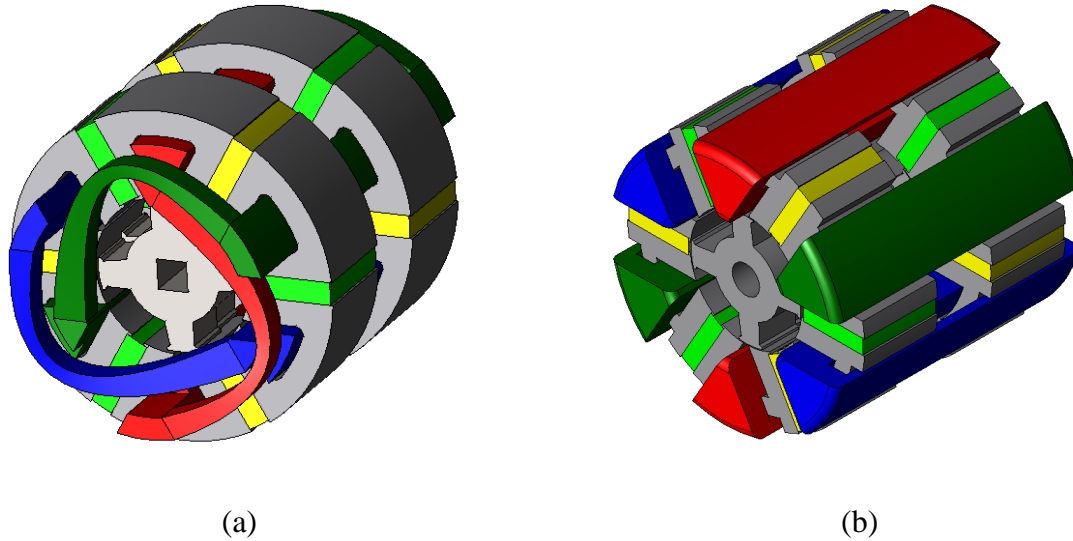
Realization of single-layer winding 6/4 FSPM machine with (a) Single-layer overlapping winding (SLOW) and (b) Single-layer toroidal winding (SLTW)
